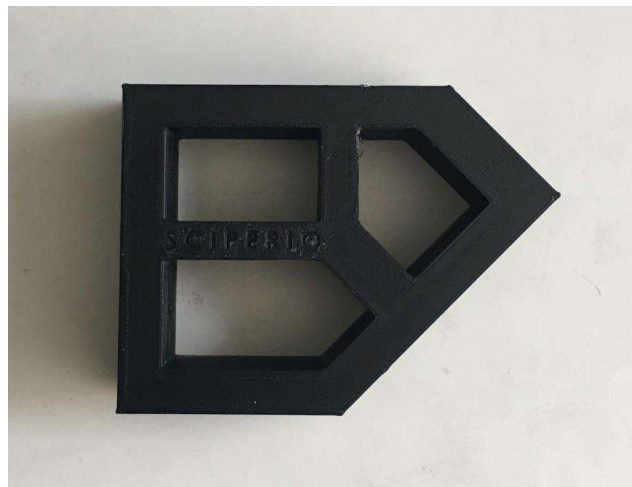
3D PRINTED 45° ATTACHMENT
